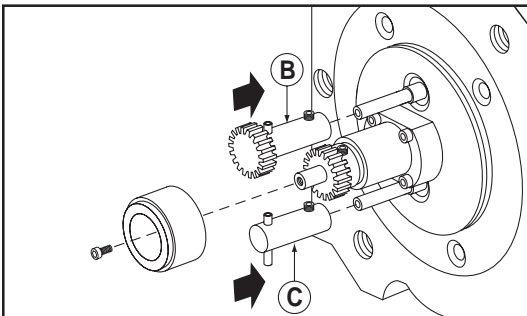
Replacing Oil Slinger (B) to top shaft & Oil Slinger Hub (C) to bottom
